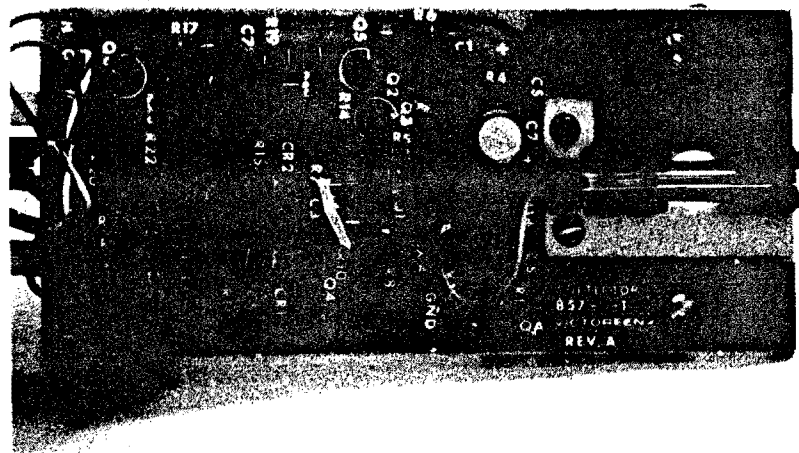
HP-R-211 Circuit Board. This picture shows the actual circuit board as removed from the housing. Notice the clean, uncorroded appearance. The GM tube is shown on the right end.
